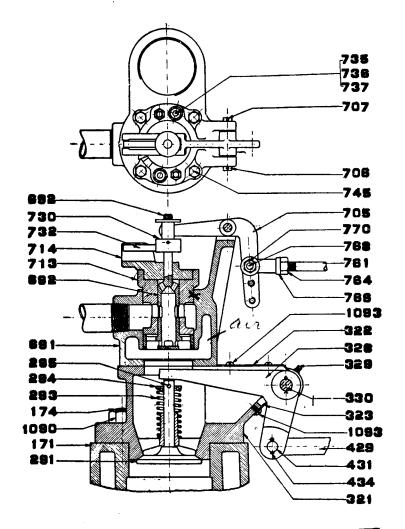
"Western" Gas Engine. (Cylinder Size 8%-101/4)
